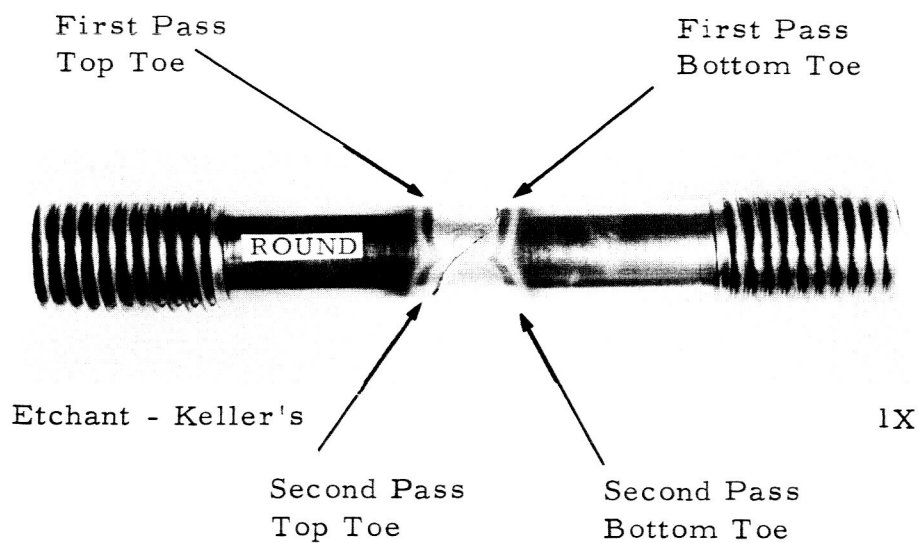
FRACTURE PATH IN A ROUND TENSILE SPECIMEN
